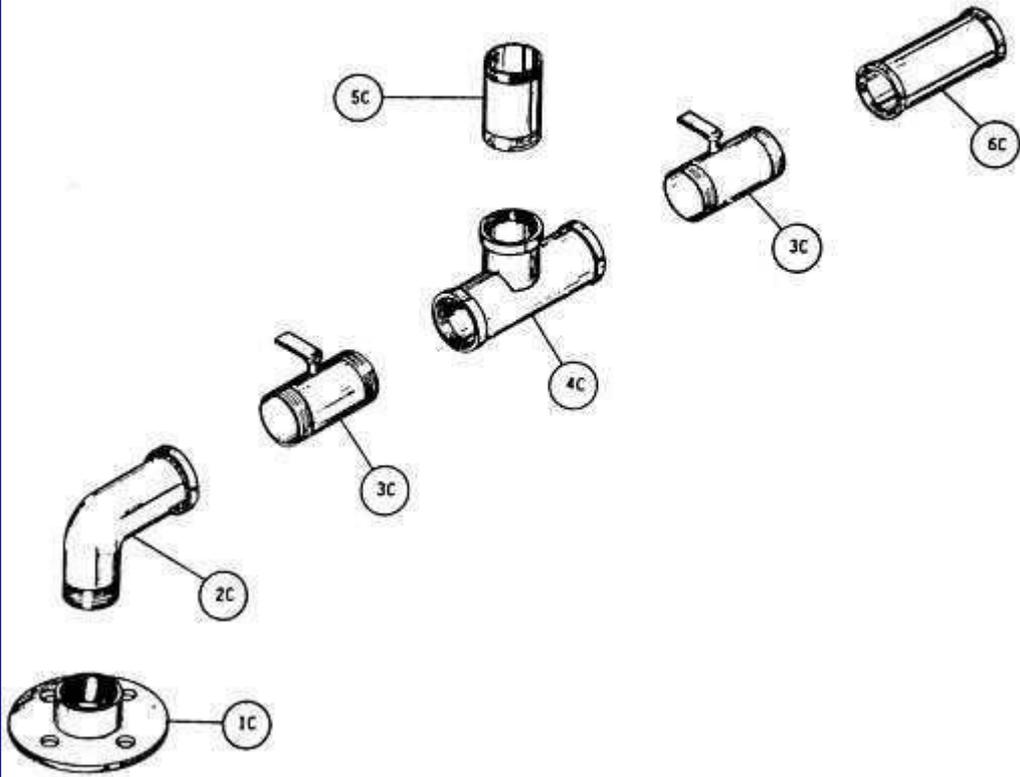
Exploded, schematic diagram of the carbureting unit and control valves.
